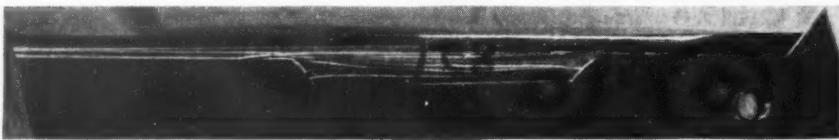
Milled appearance of sheet edge after hand routing to tolerances within .005-inch on depth of cut and .010-inch on edge of cut.
